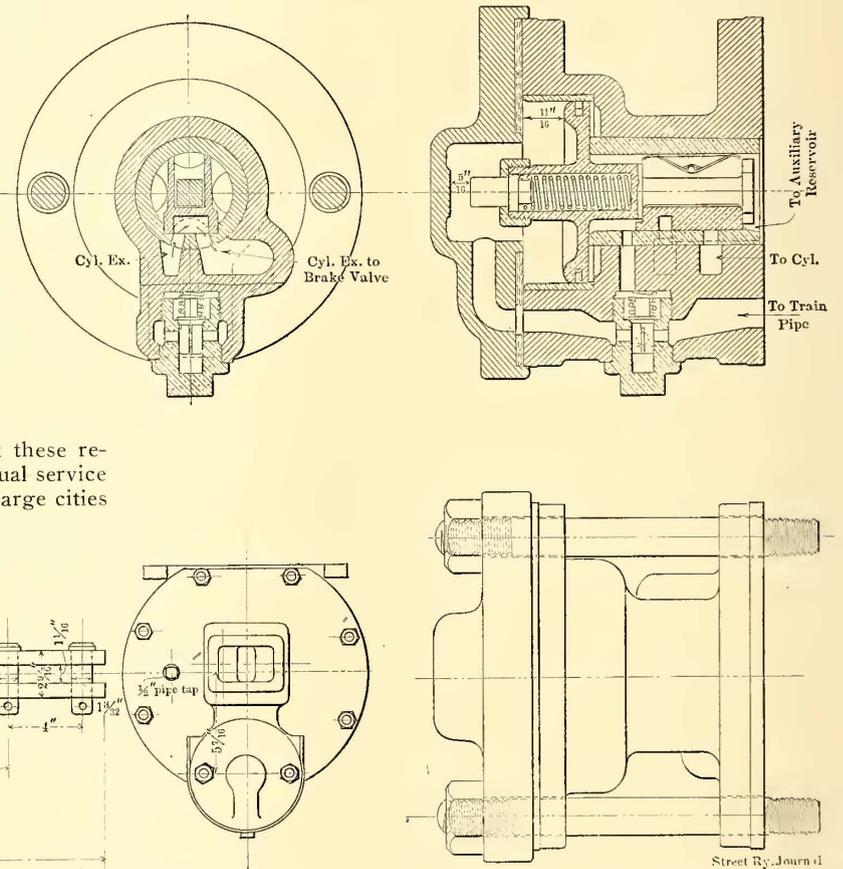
SECTIONS AND OTHER DETAILS OF SURFACE TRACTION TRIPLE VALVE
